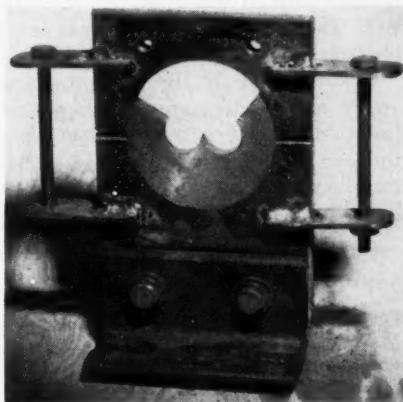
One of the nine saddles used to hold the tube sections in critical alignment. Note saddle slots for lateral and vertical adjustments. Electrical contact between the centered contact point in the plug and a taut piano wire provided for accurate alignment of saddles with one another.
